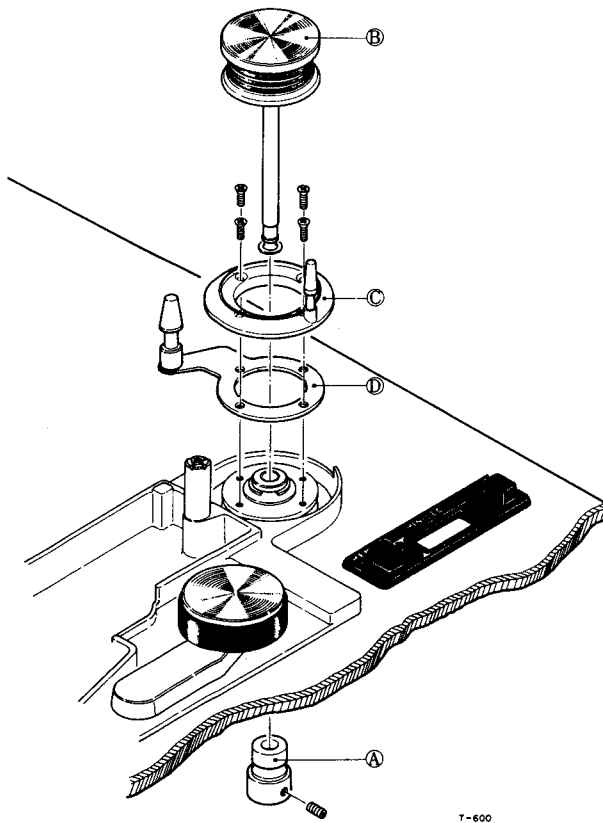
Right Tension Arm and Drive Roller ass'y Removal
